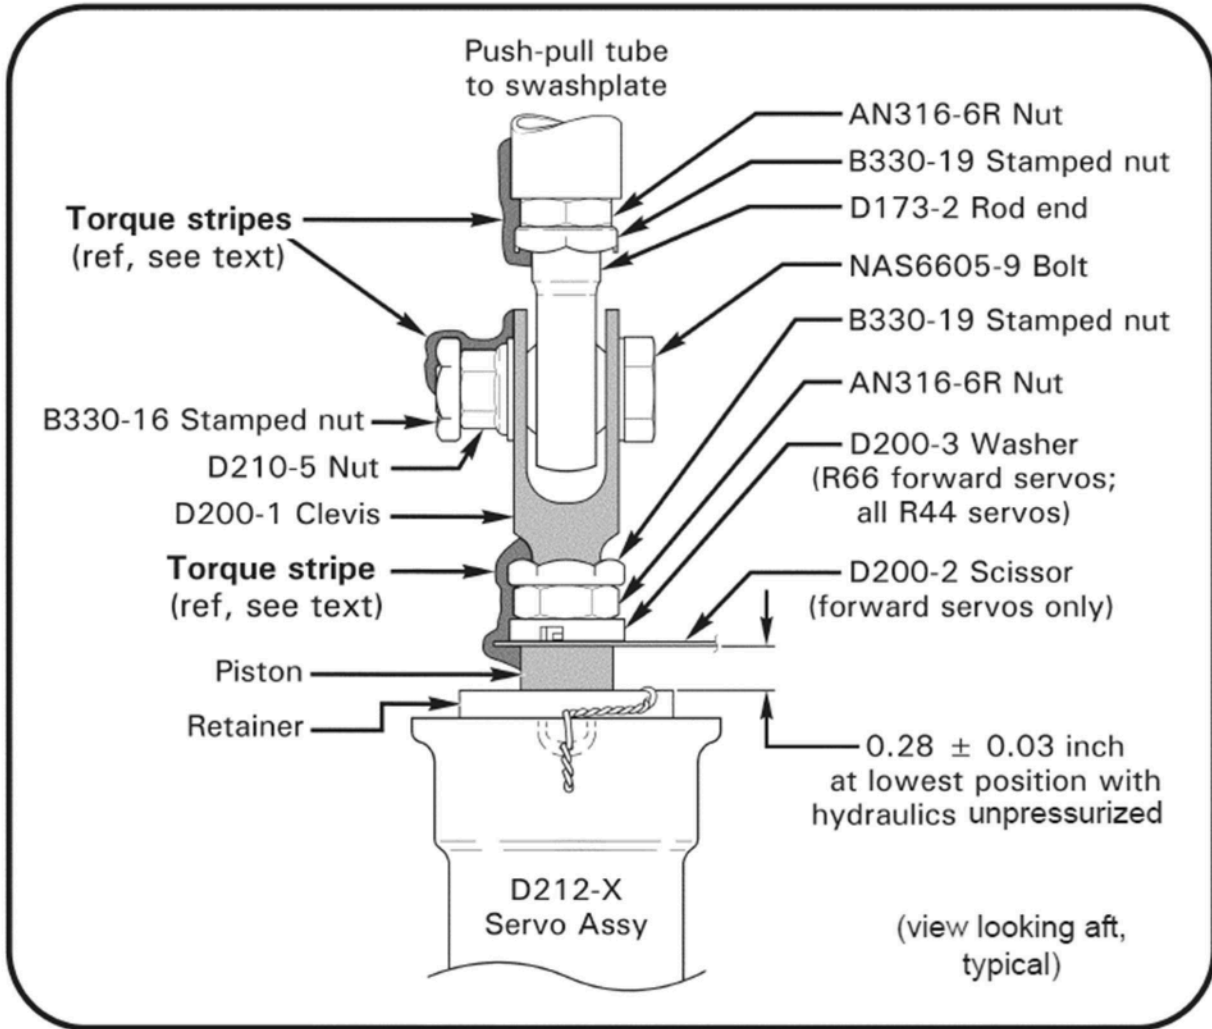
Hydraulic Servo-to-Swashplate Push-Pull Connection (3 Places).
